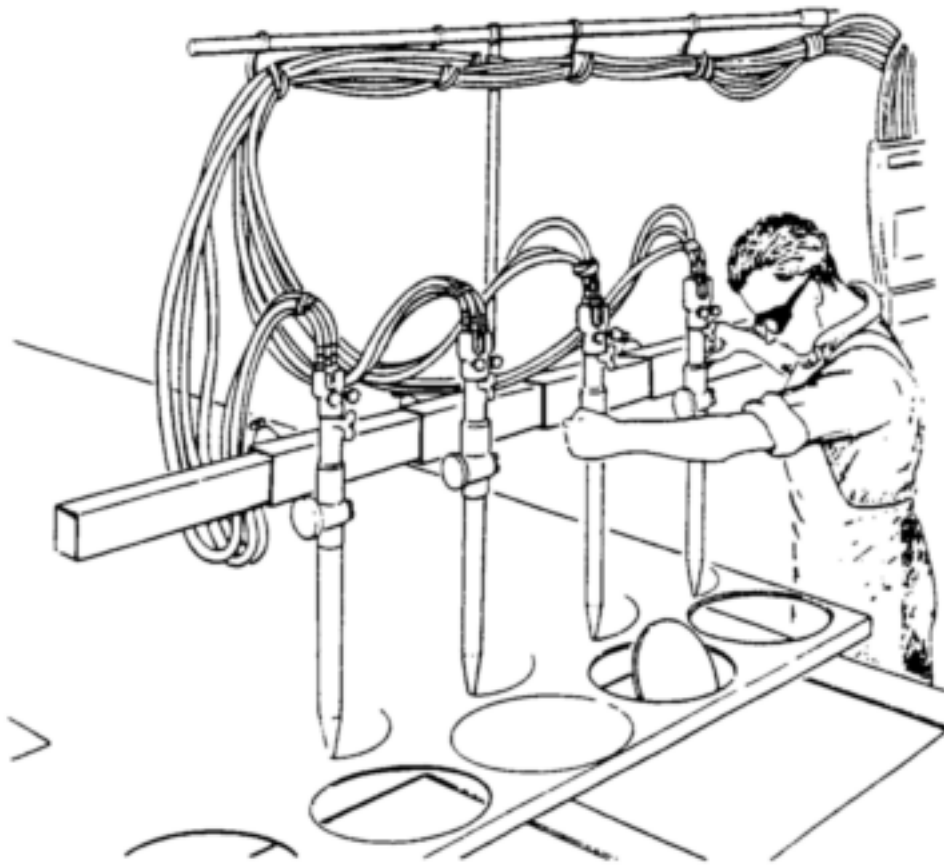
Machine for making four oxyacetylene cuts simultaneously.
